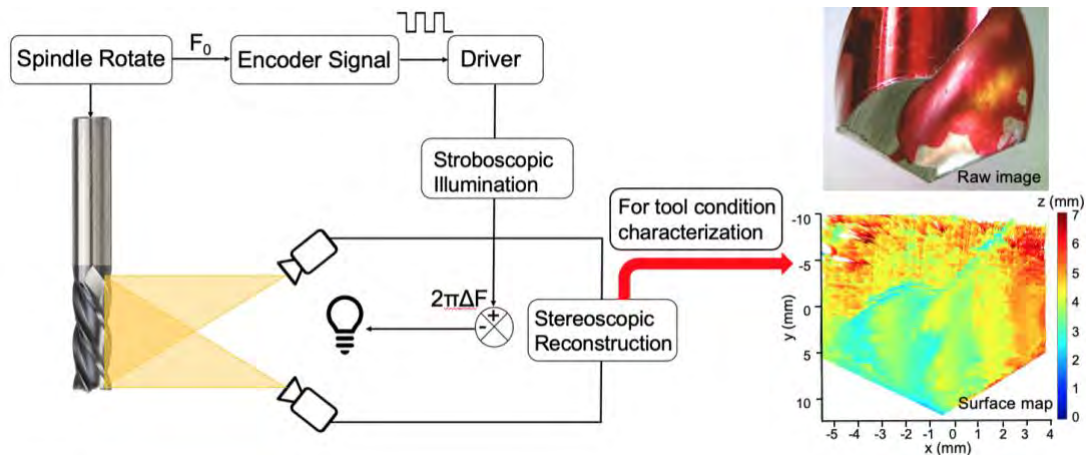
Methodology schematic of strobe-stereoscopy 3D imaging for Drilling/Milling tools metrology and inspection.
